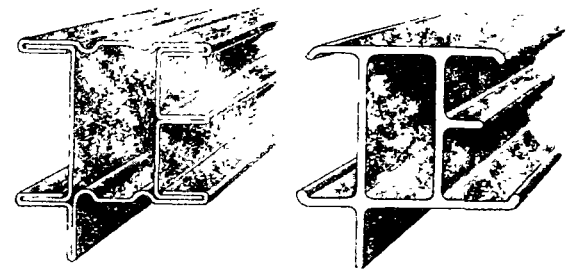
Crimped tubular sections often permit redesign to extrusions with gain in stiffness and strength. Too, cost can be reduced.
